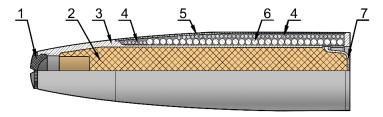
Main parts of the 128 mm M77 HE warhead: (1) fuze well closing plug, (2) explosive charge, (3) warhead body, (4) smaller steel balls, (5) liner, (6) larger steel balls and (7) warhead base
